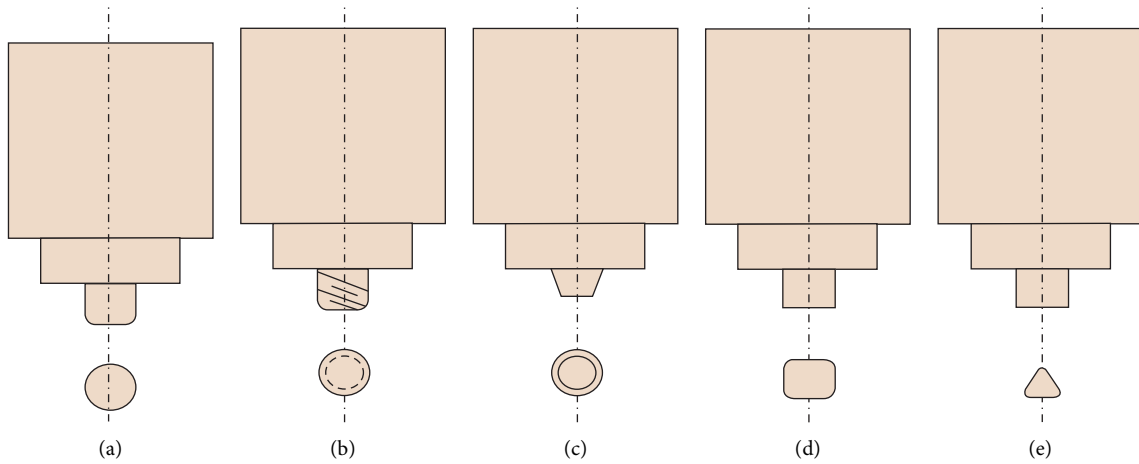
Different tool profiles: (a) straight cylindrical, (b) threaded cylindrical, (c) tapered cylindrical, (d) square, and (e) triangle.
